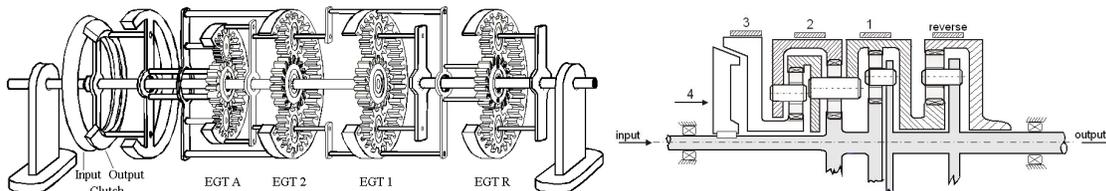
The components of the Wilson Gearbox and the components used to set the gears and sketch of the Wilson Gearbox
